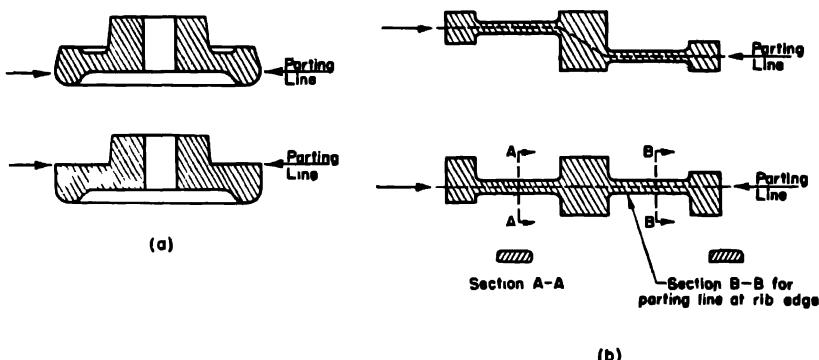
Redesigns which facilitate parting. (a) Lower design eliminates need for overhanging sand in cope. (b) Lower design of four-spoke crank gives straight parting line either at centerline of the arm (for section AA) or at the bottom of the arm (for section BB).
